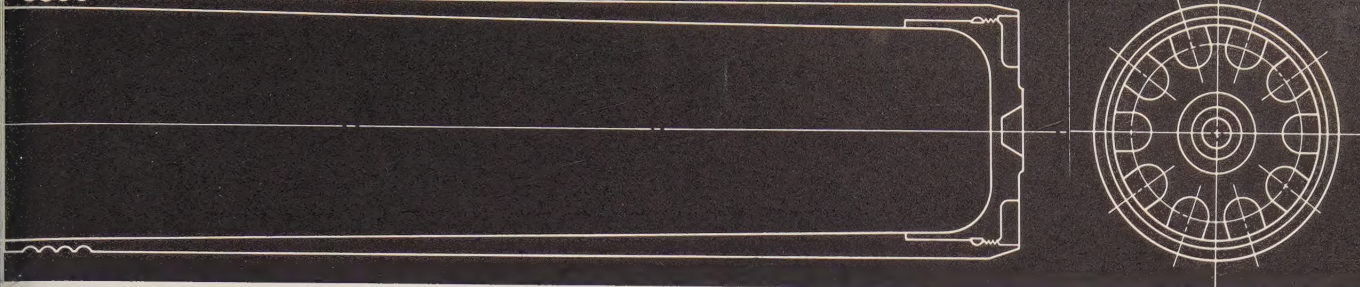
The final cup design consisted of 2 stainless steel sections: the bottom or drive section, and the upper or conical tube section. The drive section was machined from solid stock, ground and polished, and attached to the tube section by a shrink-fit threaded joint. Rubber-covered driving lugs engaged recesses in the bottom of the cup. The entire inside surface was polished to a micro-finish to aid in producing a mechanically perfect liquid film surface and to facilitate cleaning after use. While other designs were tried, the simple, flat rim at the top with slightly eased edges was most satisfactory with regard to discharging the liquid into the collector ring.
